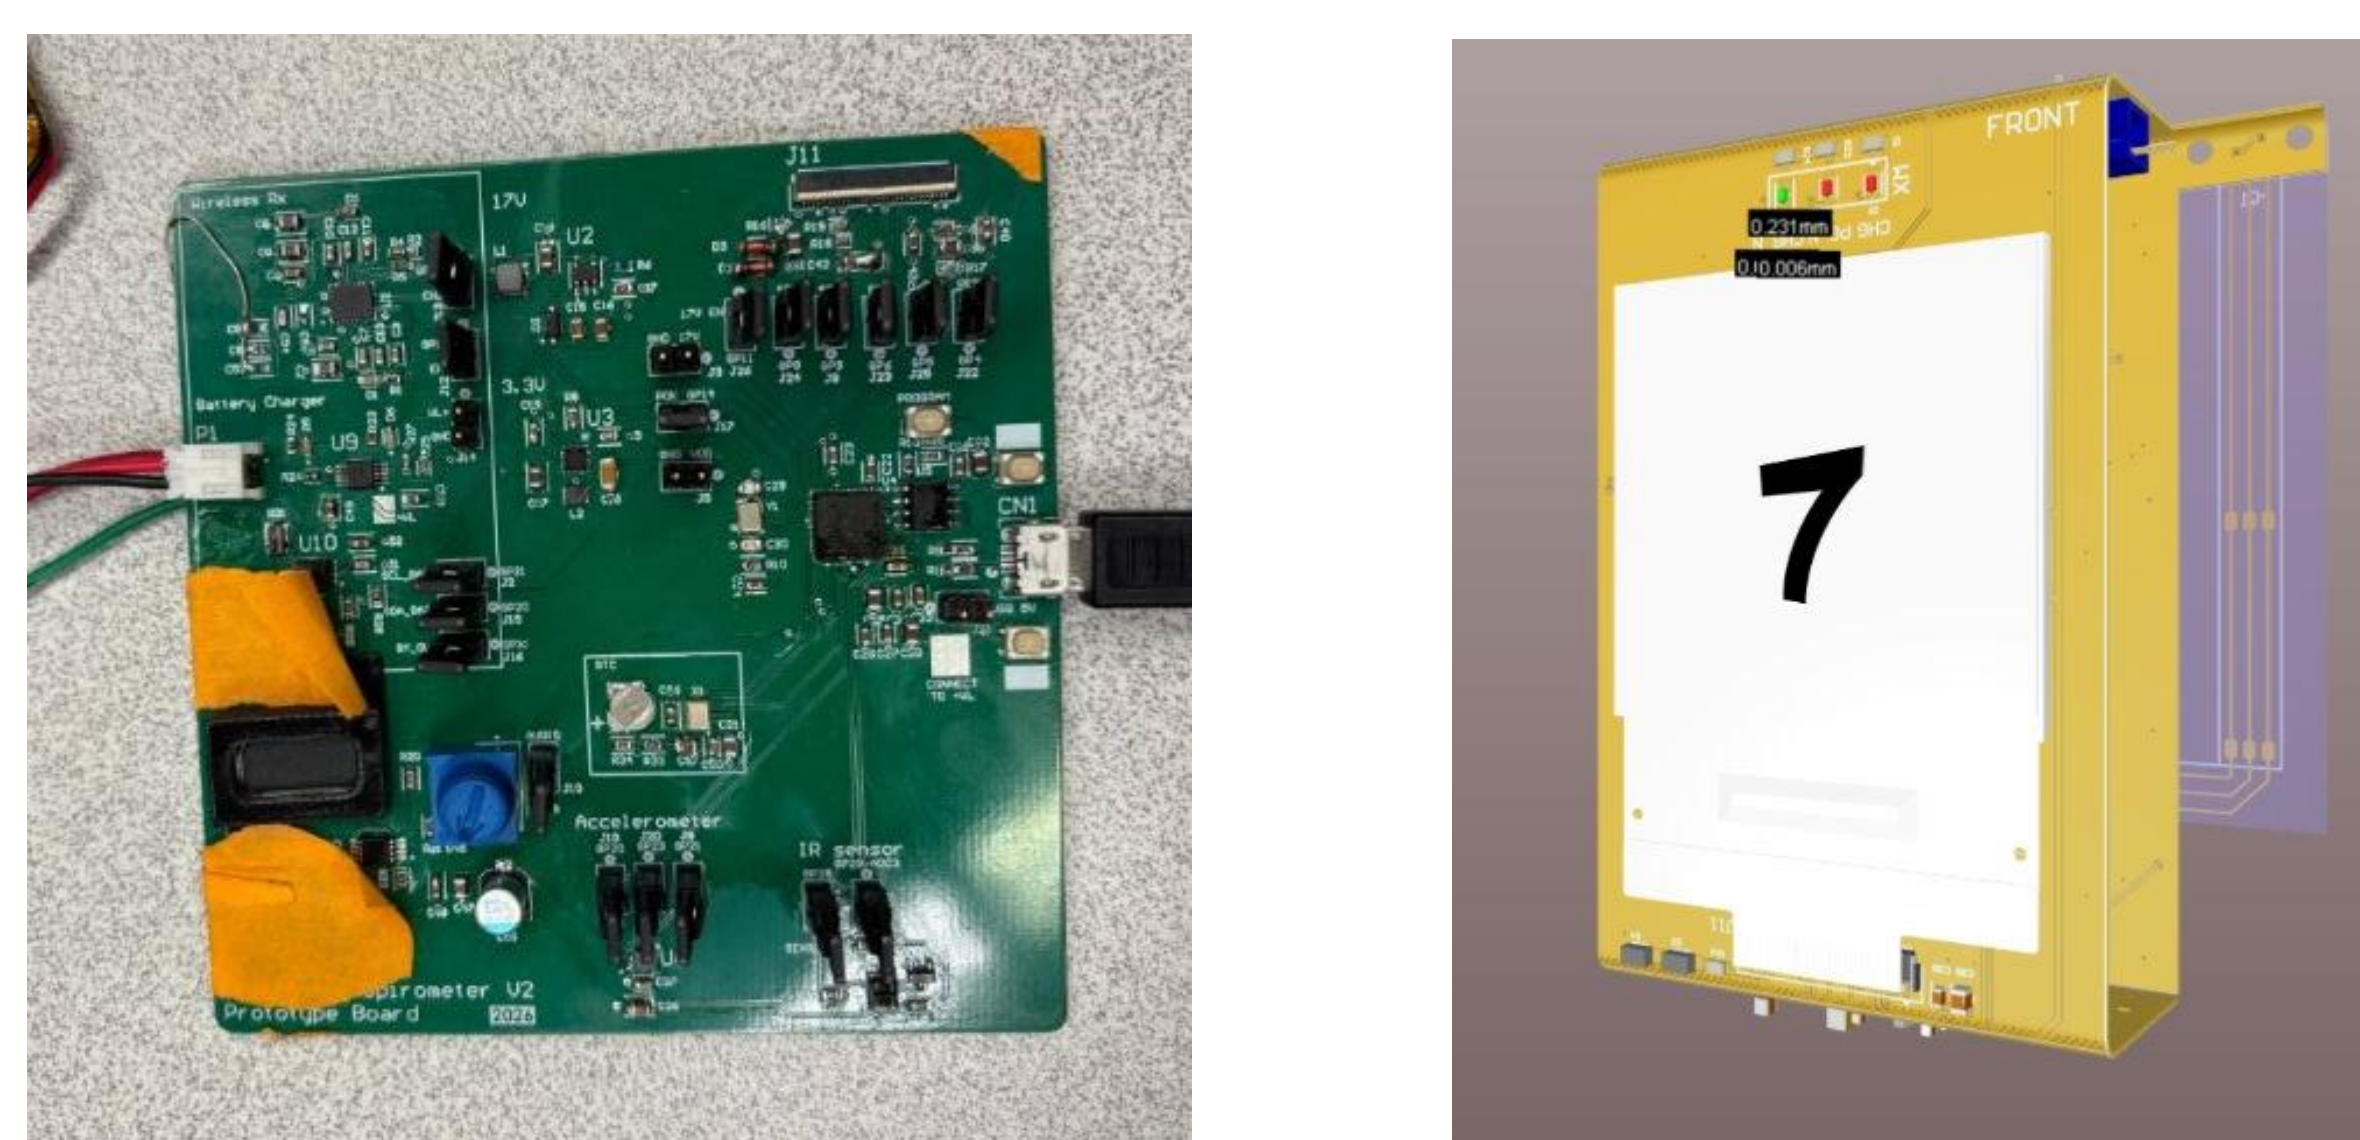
(Left) Prototype PCB (Right) Model of assembled final flex-PCB
